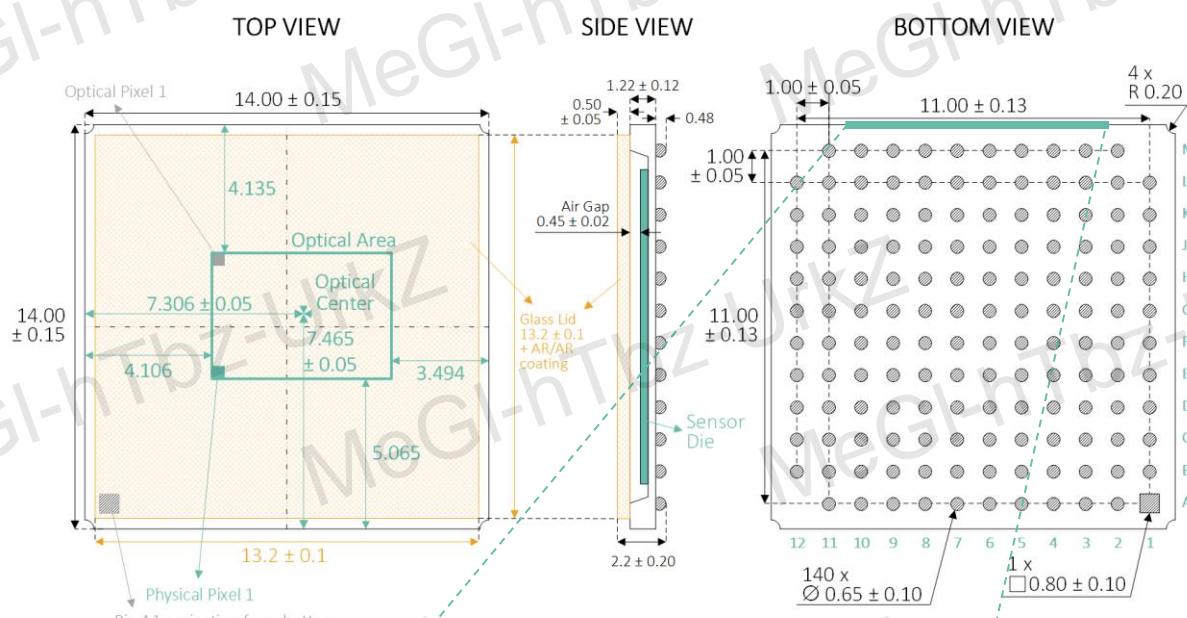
MLX75027RTC Mechanical Dimensions (in millimeter)
